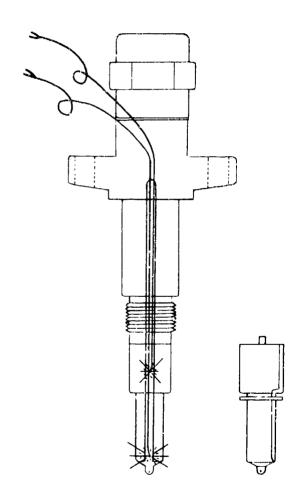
DETAILS OF CLR INJECTOR INCLUDING THERMOCOUPLES
